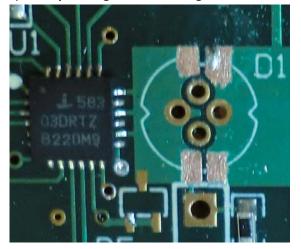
SOLDER MASK REMOVED FOR RESISTORS
